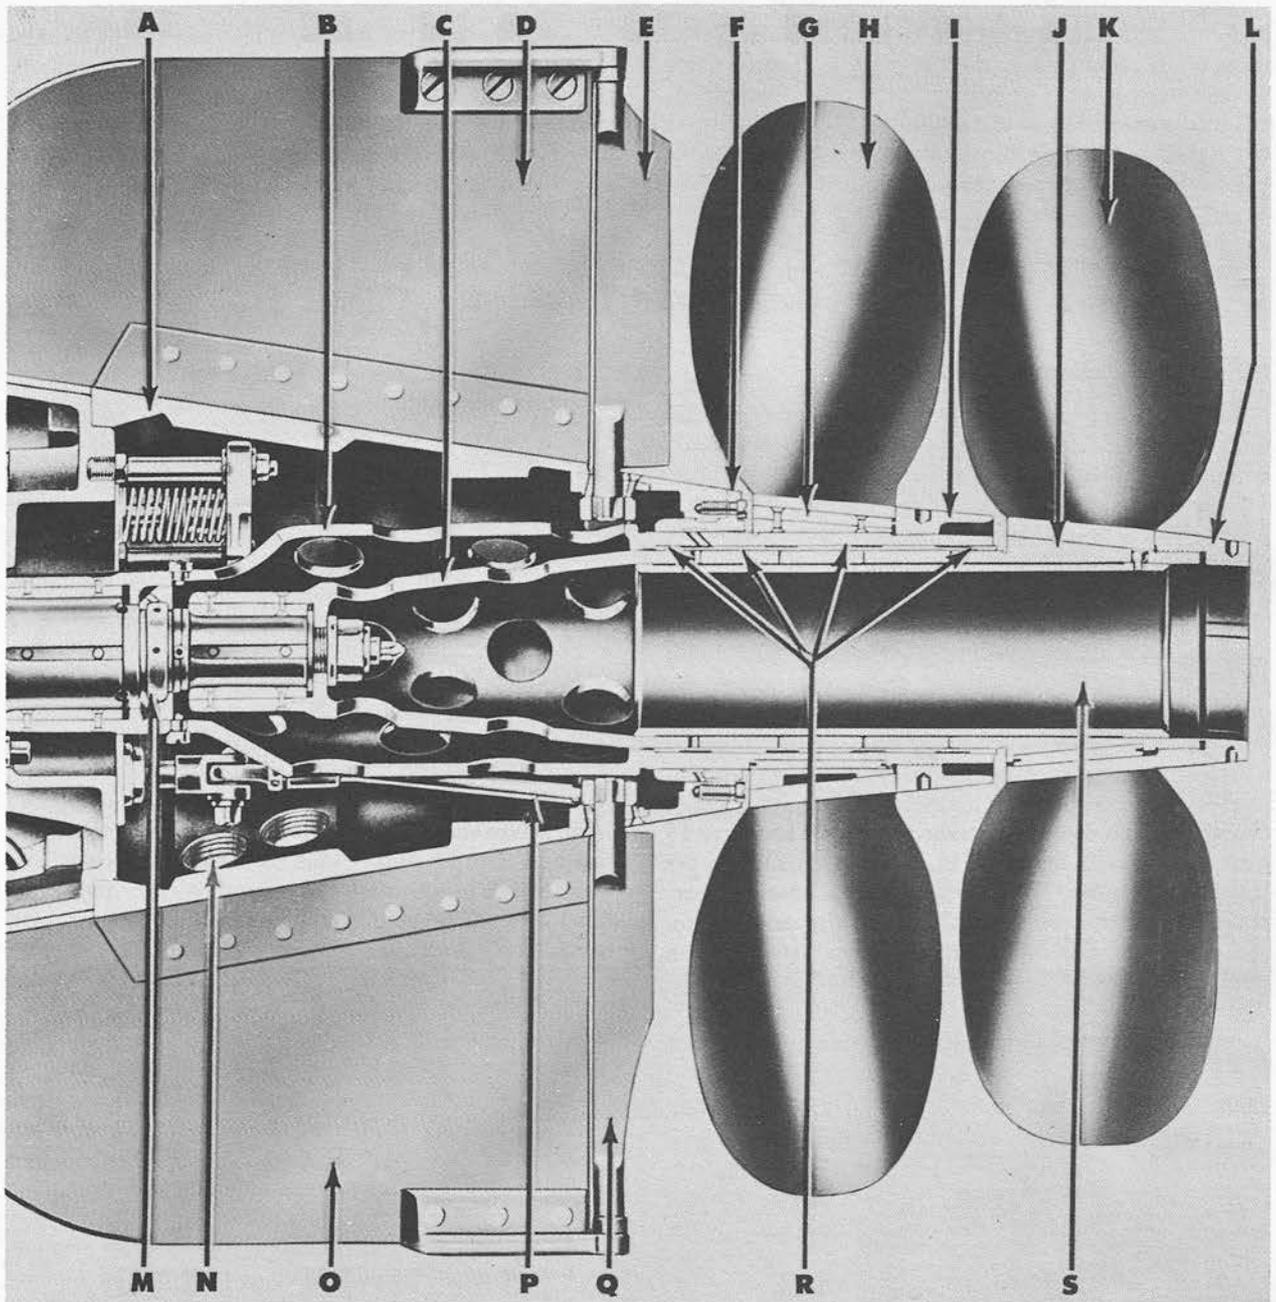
G1.—Cutaway view of the tail section: (A) tail cone; (B) forward propeller sleeve; (C) after propeller sleeve; (D) vertical blade; (E) steering rudder; (F) tail bearing; (G) forward propeller hub; (H) forward propeller; (I) forward propeller nut; (J) after propeller nut; (M) grease retainer ring for forward propeller sleeve; (N) drain and access hole; (O) vertical blade; (P) steering rudder adjusting rod; (Q) steering rudder; (R) propeller sleeve bushings; (S) grease reservoir shell.
